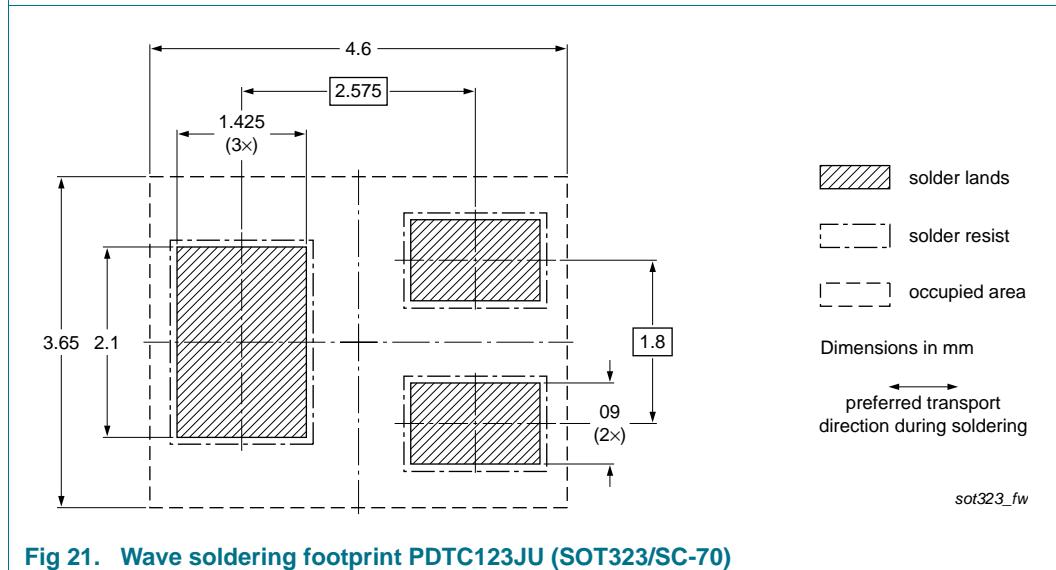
Wave soldering footprint PDTC123JU (SOT323/SC-70)
